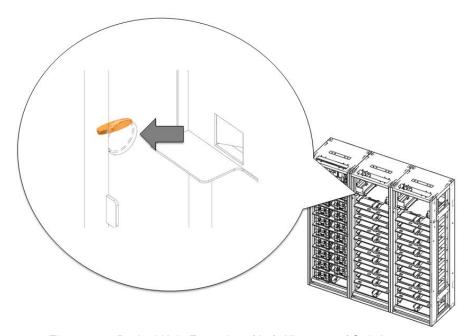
Pushed Hole Examples of Left Alignment of Switchgears
